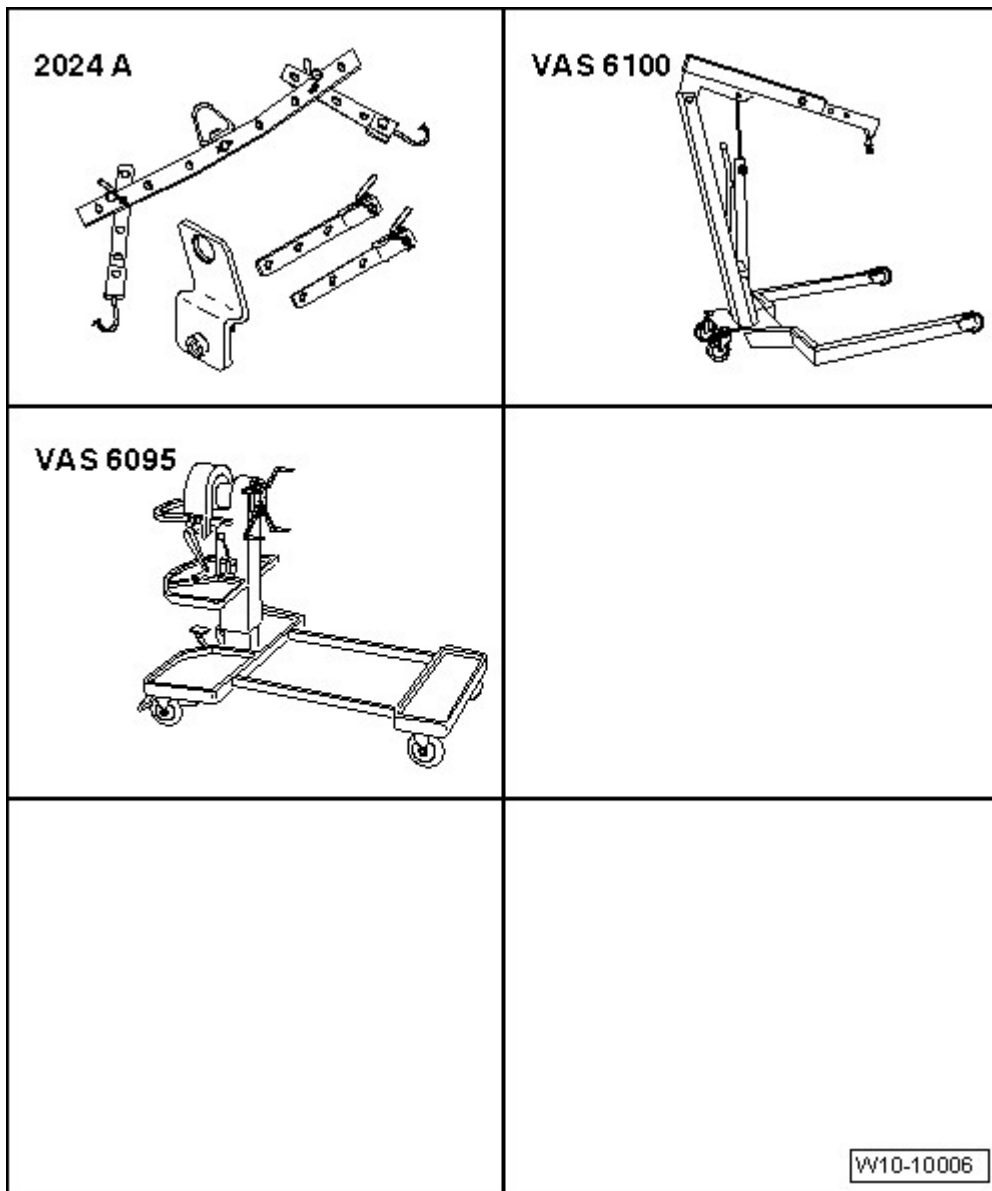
Identifying Special Tools -- Engine, Securing To Assembly Stand
